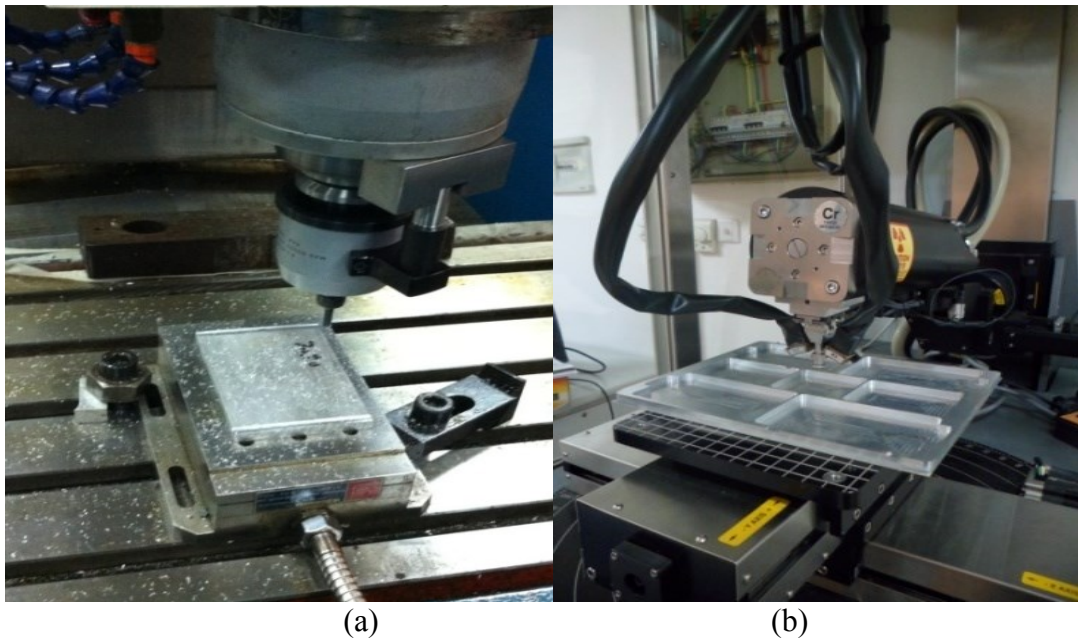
(a) Machining setup (b) X-ray measurement setup.
